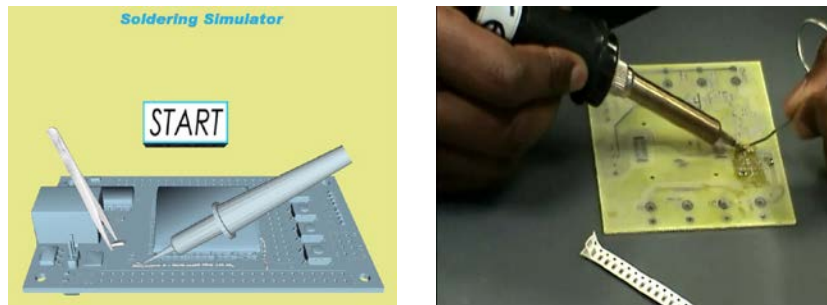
Virtual (left) and Real-World (right) Soldering Environment
